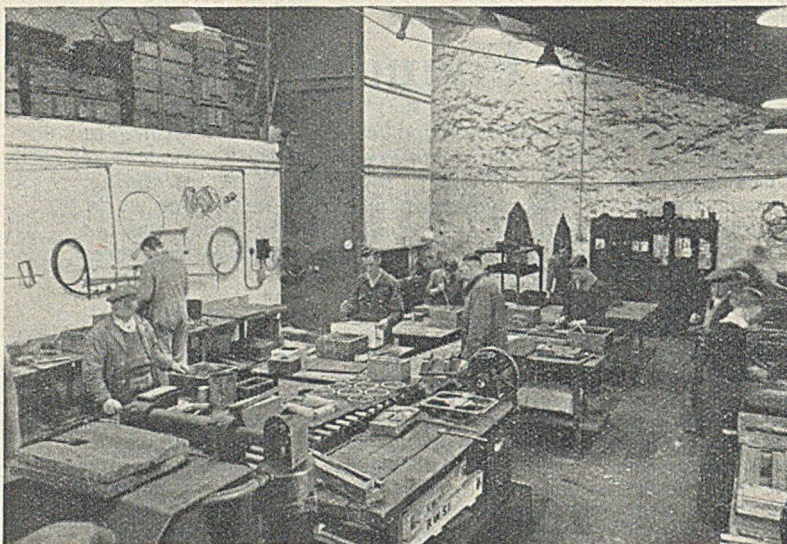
VIEW OF THE CORE SHOP; THE CORE-BLOWING MACHINE IS SHOWN IN THE FOREGROUND.
